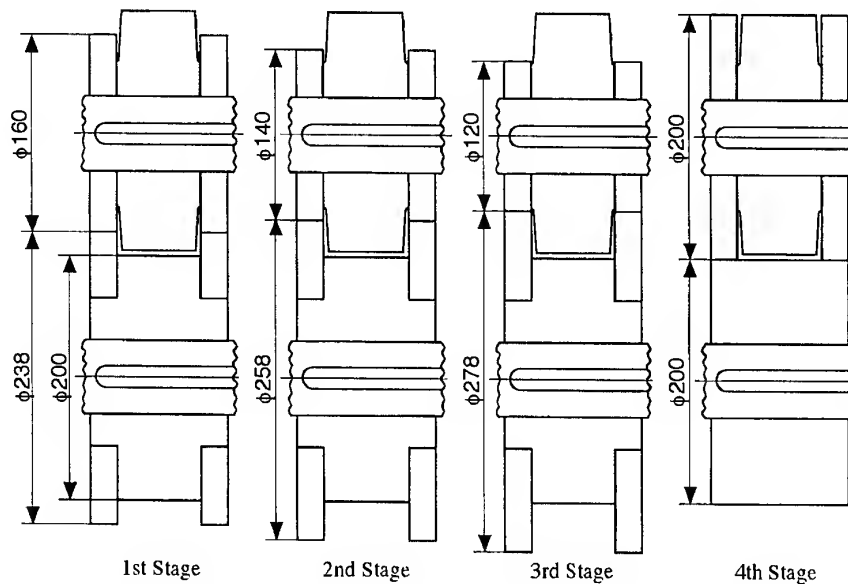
Shaping die roll and driving cylindrical roll coupling assembly.
